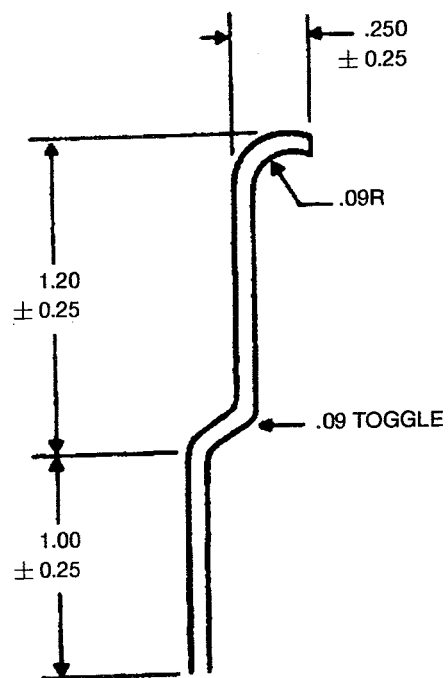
A. FORWARD FIN SPAR 4H FLANGE
